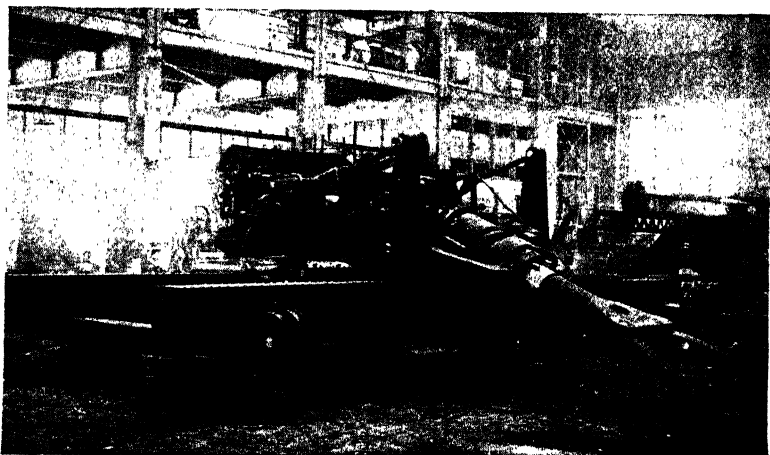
XVI.—Electric manipulator designed for handling wheel blanks. (*Courtesy of Wellman Engineering Company.*)
